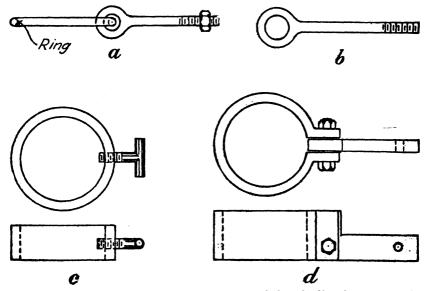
Devices which can be attached to the auger shaft and adjusted to any position so that a hook on the hoisting rope can be quickly hooked on instead of tying and undoing knots; a and b are used on shafts with holes drilled at intervals such as used with the pipe-cross handles; c and d are used on the plain or bolt shafts.
